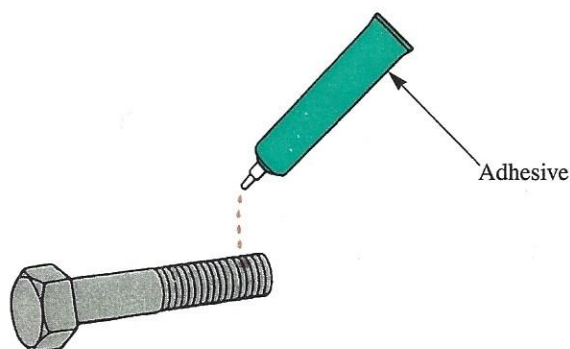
A drop of thread adhesive can be placed on the thread to lock a screw or nut.
